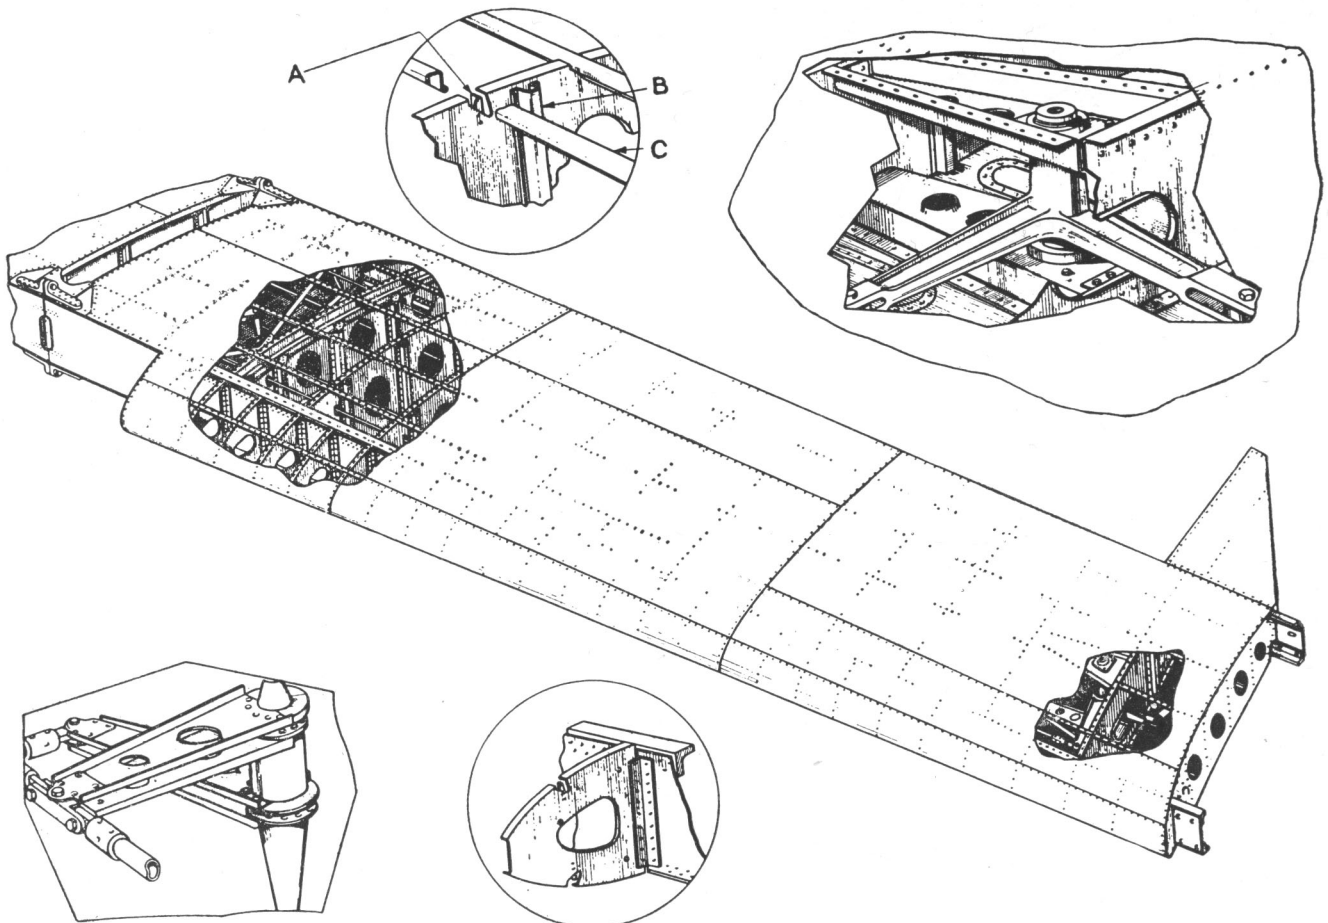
Cutaway view showing the construction of an Avro Lancaster stabilizer. Sketch at upper left shows structural details of ribs and stringers reinforcing strip (A); vertical channel (B); stringers (C). At upper right is the detail of the control crank and mounting. Sketch at lower left shows control rod connections. At lower right is detail of the attachment of the nose rib.
